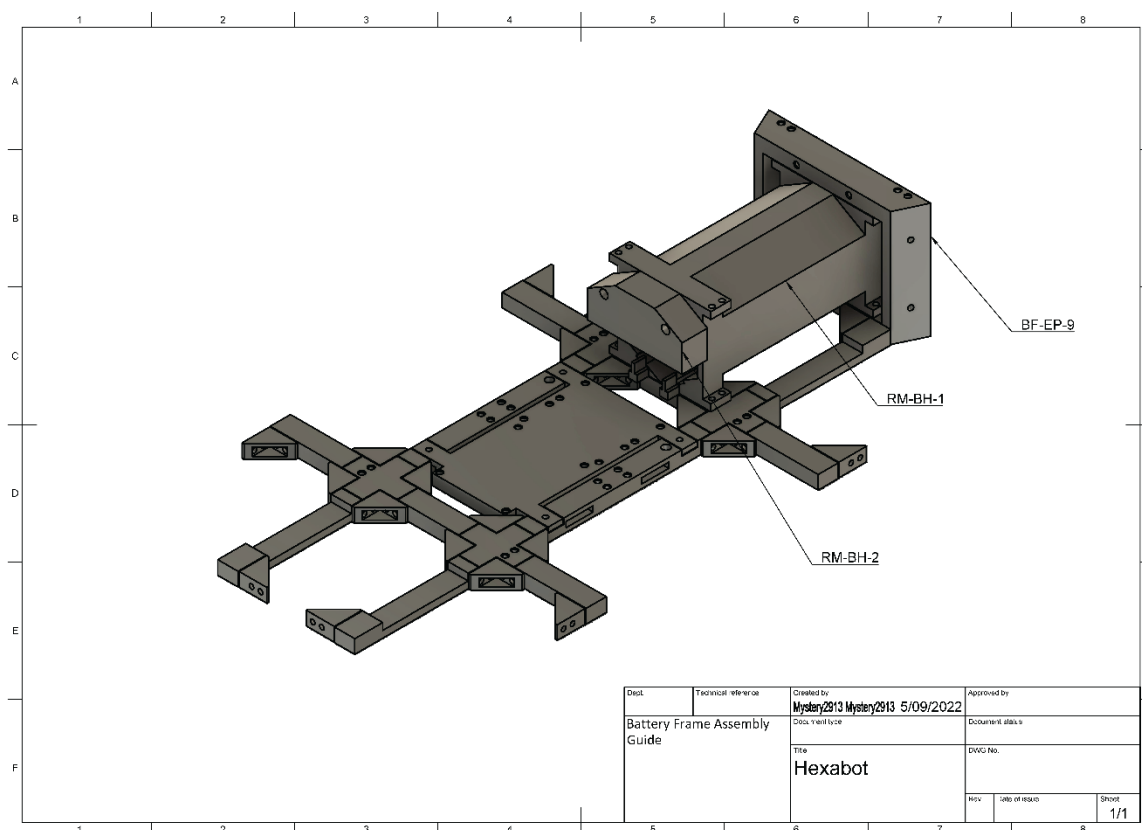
11 Battery Frame Assembly. (Note that the top frame has been removed from this diagram for ease of use, however the RM-BH-1 should be attached to the top frame.)
